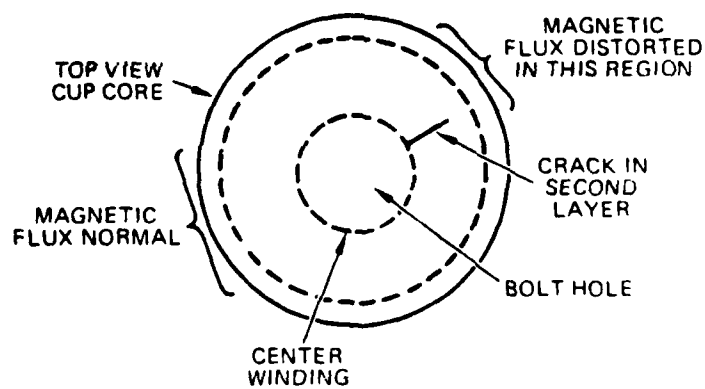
Top Schematic View of Cup Core Over a Bolt Hole
